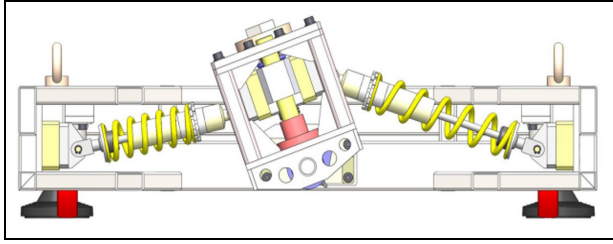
Cross-sectional view of the complete inclined roll mechanism.
